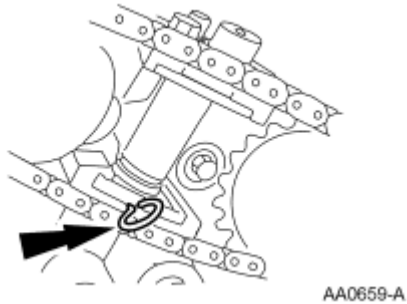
Identifying Secondary Timing Chain Tensioner & Lock pin
